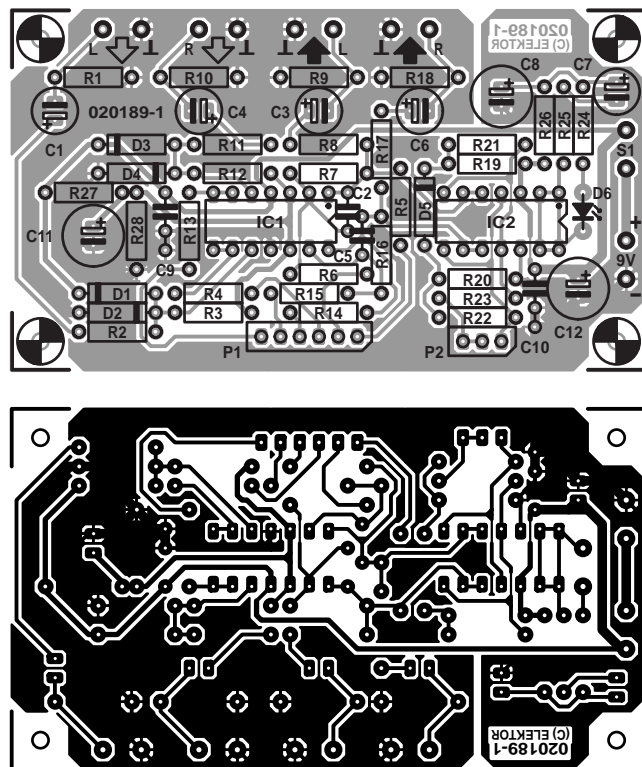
The dimensions of the PCB make an extremely compact construction of the level adapter possible.
